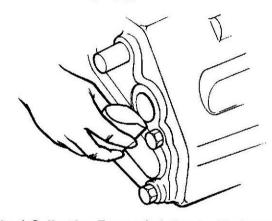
Collecting Excess Lubricant with Paper Cup.
